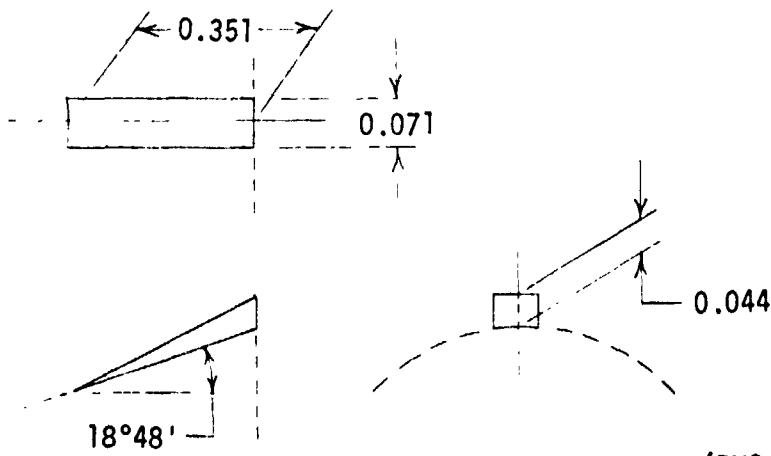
(con't) PROTUBERANCE DIMENSIONS
